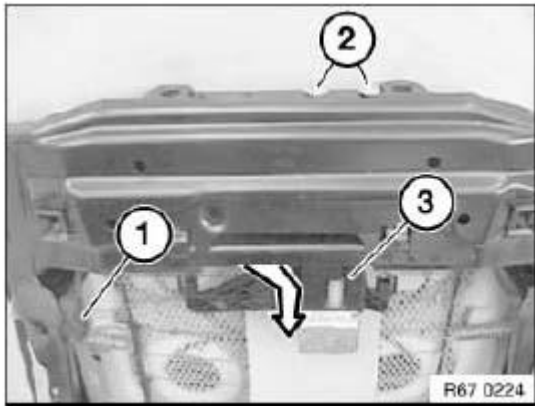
Feeding Out Drive For Head Restraint Height Adjustment
